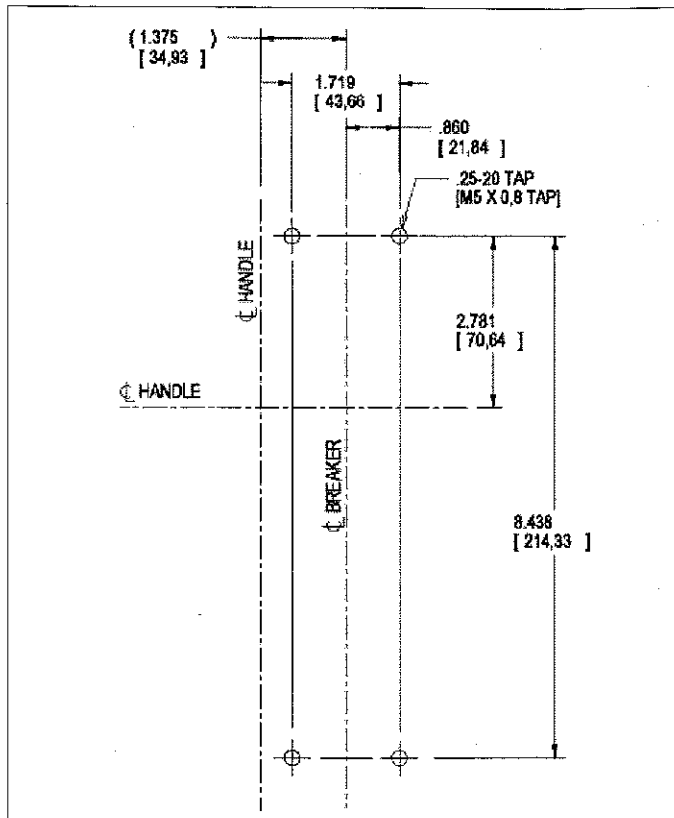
Drill & Tapping Plan for K-Frame Breaker
